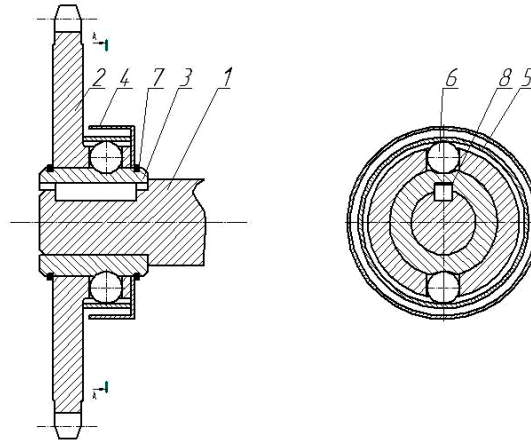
Ball bearing coupling with bearing radial engagement elements
